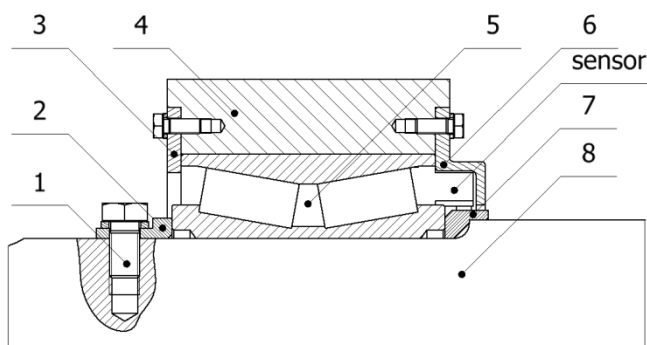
Axlebox build [4]: 1. Fixing bolts; 2. Locating ring; 3. Front cover; 4. Axlebox body; 5. Rolling bearing – CTBU; 6. Back cover; 7. Stopper ring; 8. Wheelset axle.
